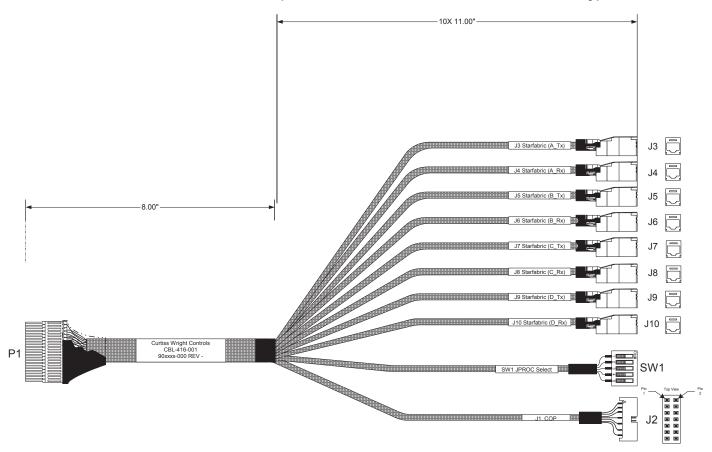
CBL-416-000 (CHAMP-AV IV Standard P0 Cable Assembly)
